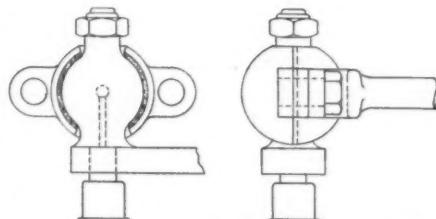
A non-adjustable joint which is, however, to a great degree self-protecting
